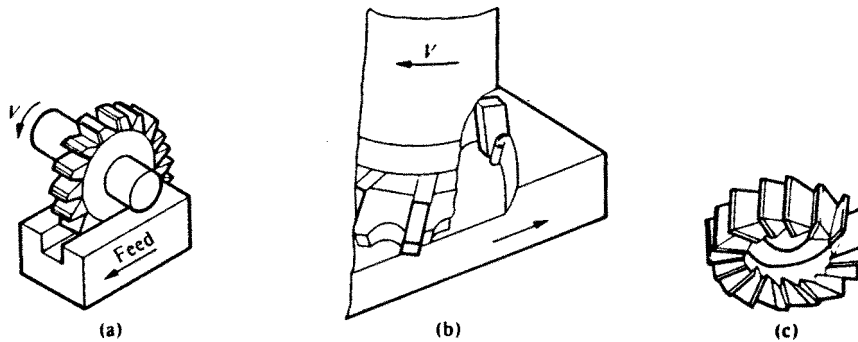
Principal types of milling cutters. (a) plane, (b) face, (c) end. [2]
